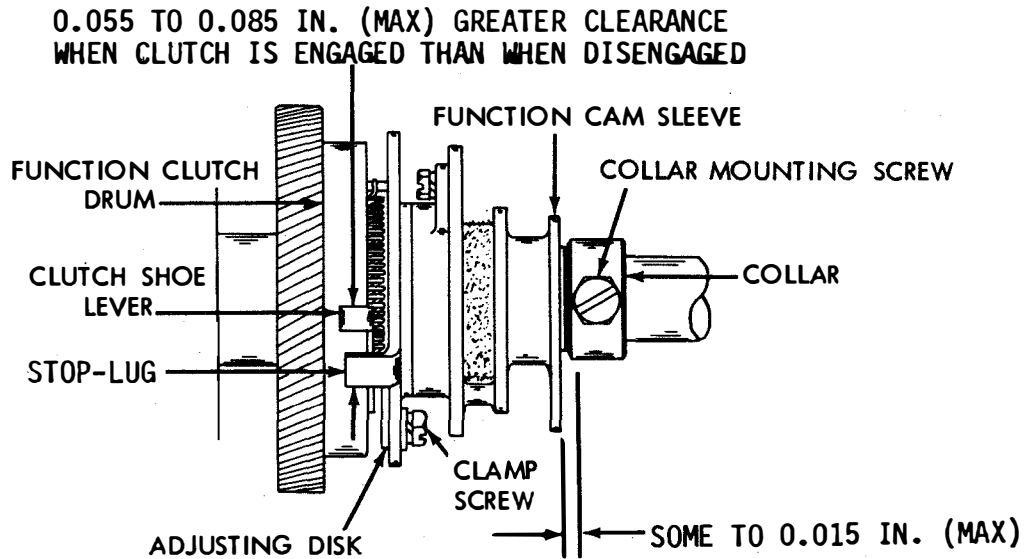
Function Clutch Shoe Lever and Drum End Play
